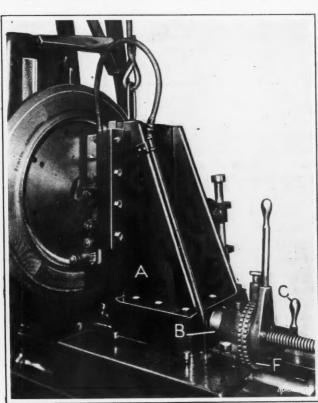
Special Slide carrying Cutter-head of Machine shown in Fig. 2
